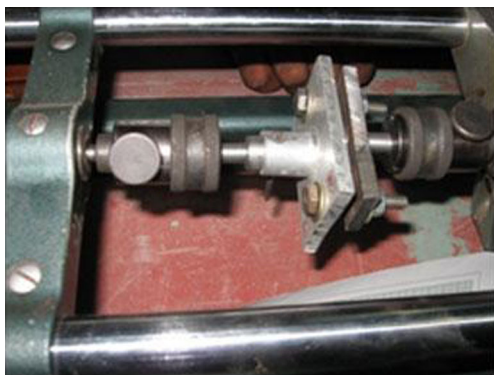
Tube-to-tube plate joint loaded in a tensometer
